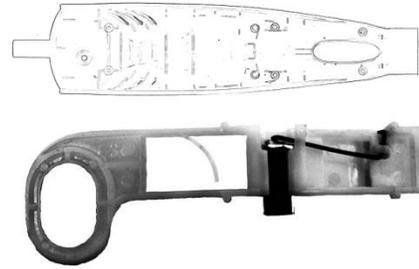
Redesigned Electric Knife Housing and Blade Mount
